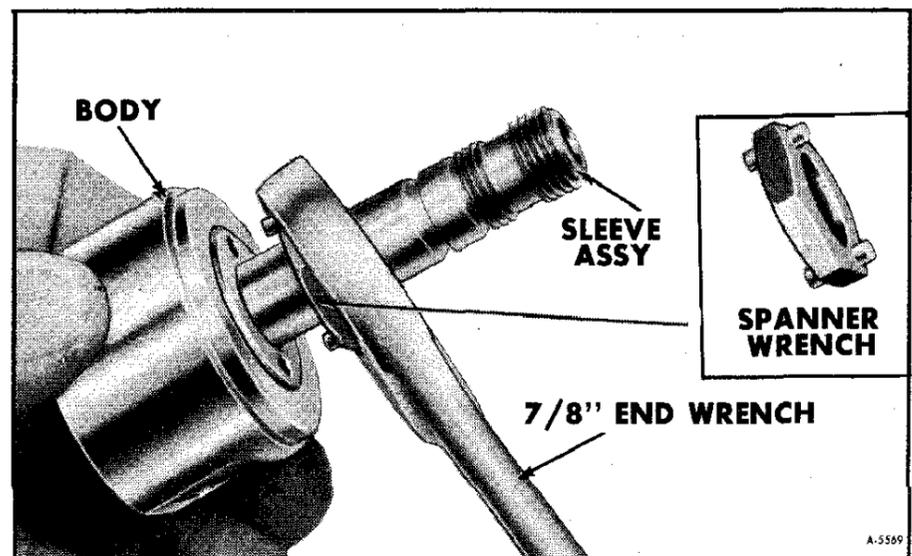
Removing or Replacing Sleeve with Special Tool (Spanner Wrench-Skinner #V0233)
